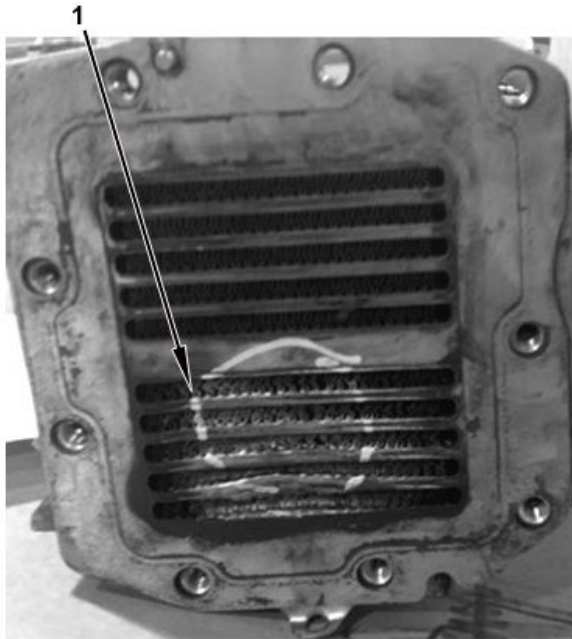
High-Temp (HT) EGR Cooler Inlet.
